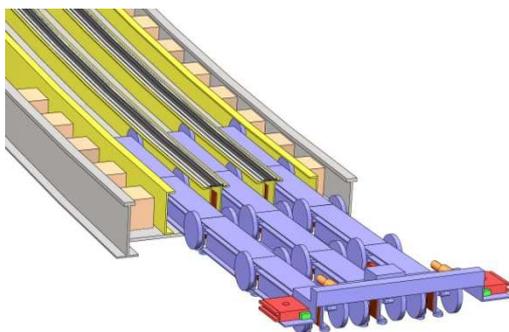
shows the main drive moving magnet assembly (blue) with articulated sections, guide wheels and brakes (red)
